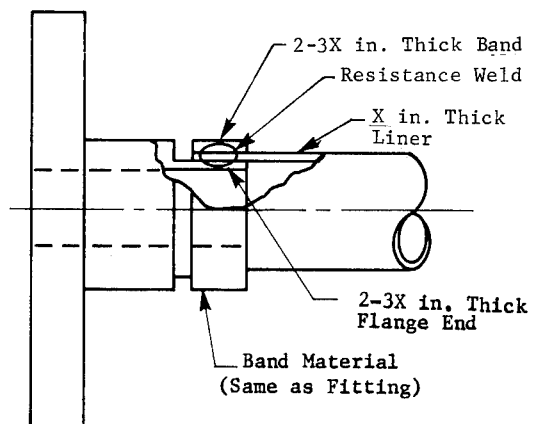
Resistance Welding Liner to End Fitting with Strengthening Band
